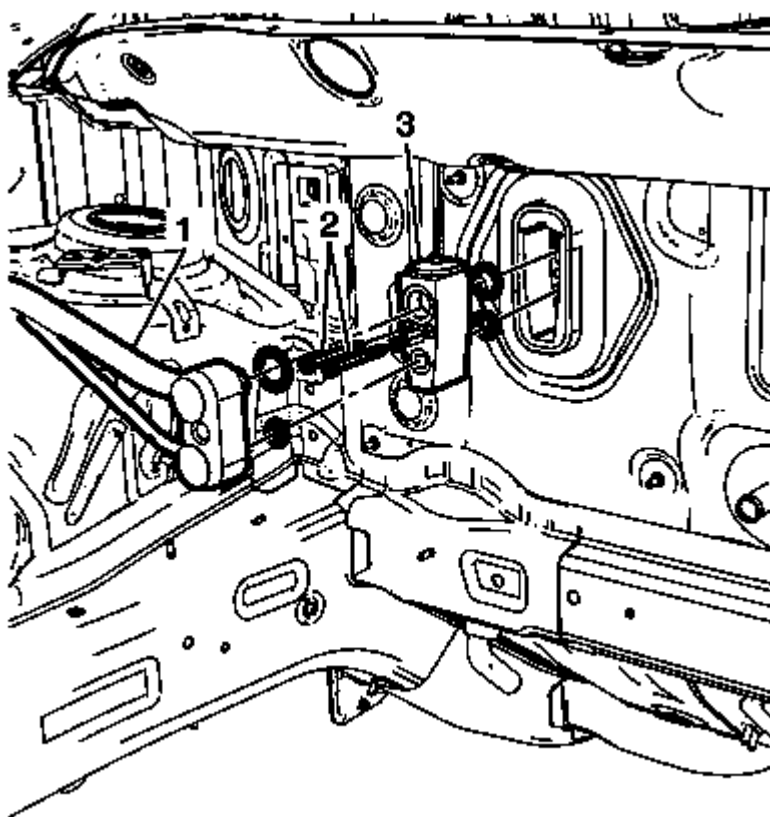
A/C Evaporator Hose And A/C Evaporator TXV
